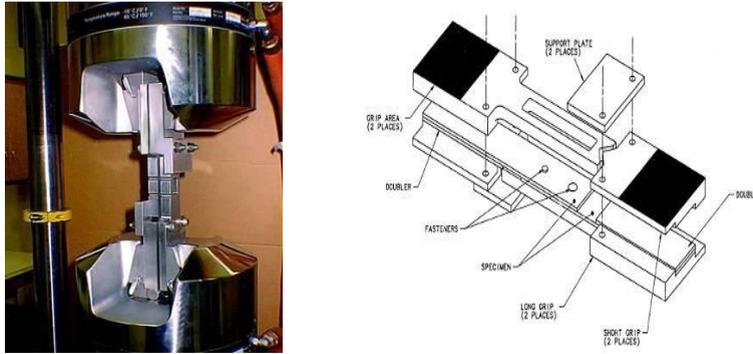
Filled hole compression test fixture ASTM D 6484 [4]
